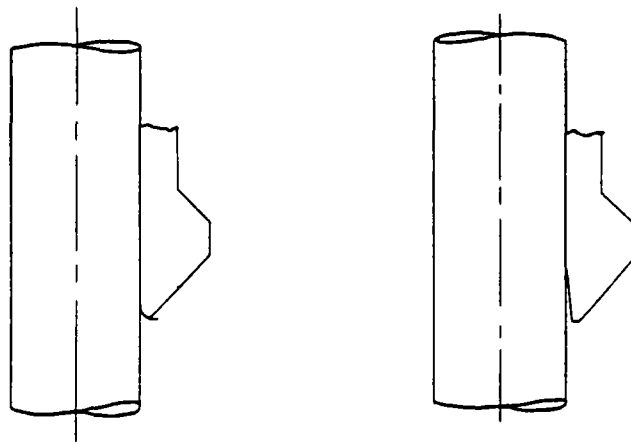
Convergent Inlet Passages on Seal Formed by Rounded Edge/Bore Taper
